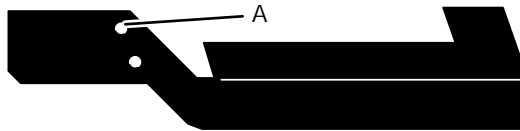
There are two holes in the manual cut lever. Attach the lever to the cutter shaft at A.
